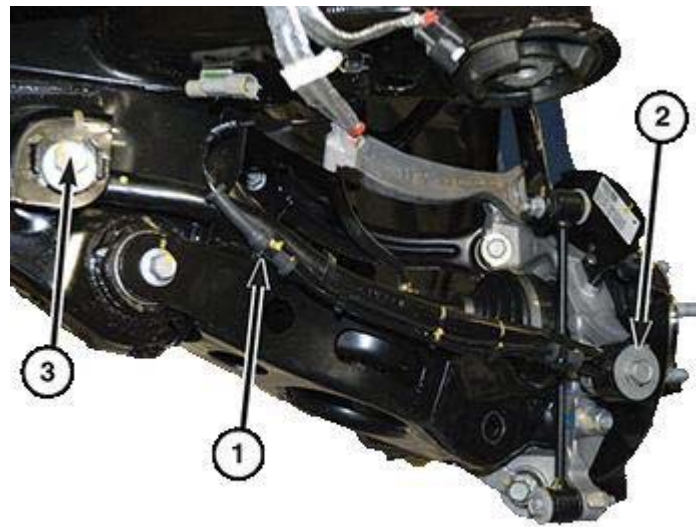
Wheel Speed Sensor Cable, Toe Link To Knuckle Bolt & Adjustment Cam To Crossmember Bolt
